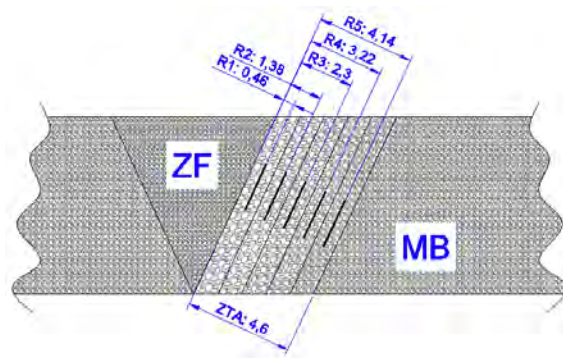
Schematic drawing of the welded joint with five regions of the HAZ
